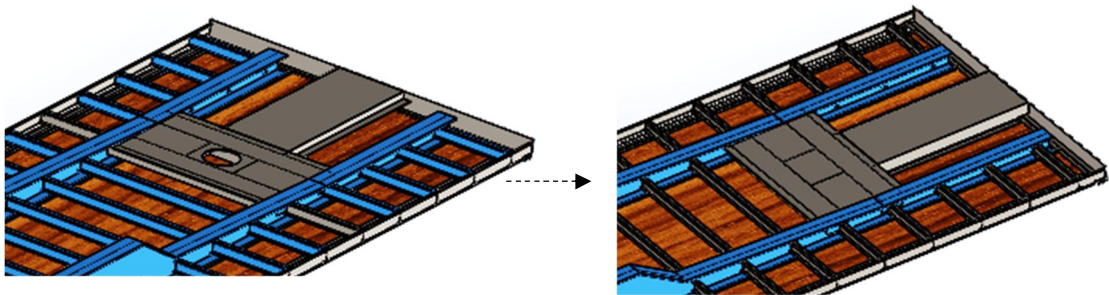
In the kingpin assembly, cut-out was replaced with the flat area and kingpin support flat draft was removed for the ease of meshing.
